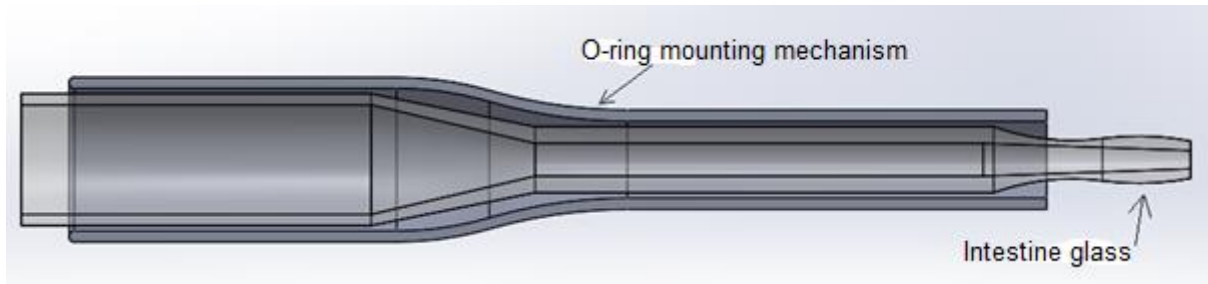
The picture shows the Intestine glass and O-ring mounting mechanism put together.
